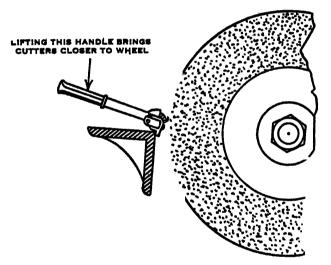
TRUING A WHEEL WITH A HUNTINGTON-TYPE DRESSER
